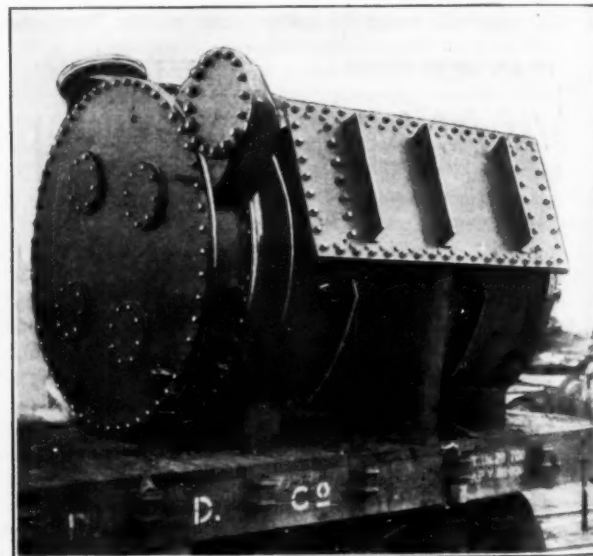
METAL-ARC-WELDED MAIN CONDENSER 7 FT. 5 IN. IN INSIDE DIAMETER AND 9 FT. 7/8 IN. BETWEEN TUBE SHEETS
